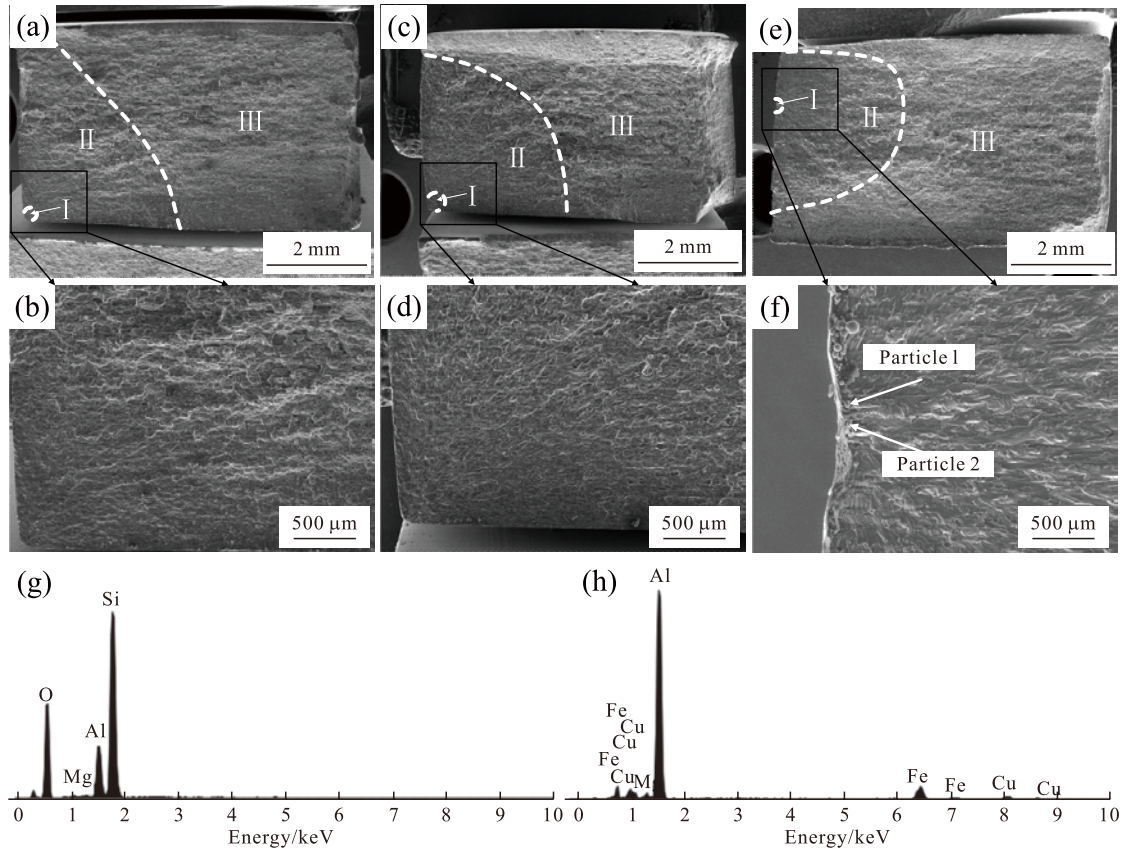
Fatigue-fractured surface and the morphology of the fatigue initiation of 7075 aluminum alloy treated at different aging temperature: (a) fatigue-fractured surface of the test C3; (b) fatigue initiation morphology of the test C3; (c) fatigue-fractured surface of the test C4; (d) fatigue initiation morphology of the test C4; (e) fatigue-fractured surface of the test C5; (f) fatigue initiation morphology of the test C5; (g) EDS of particle 1; (h) EDS of particle 2
